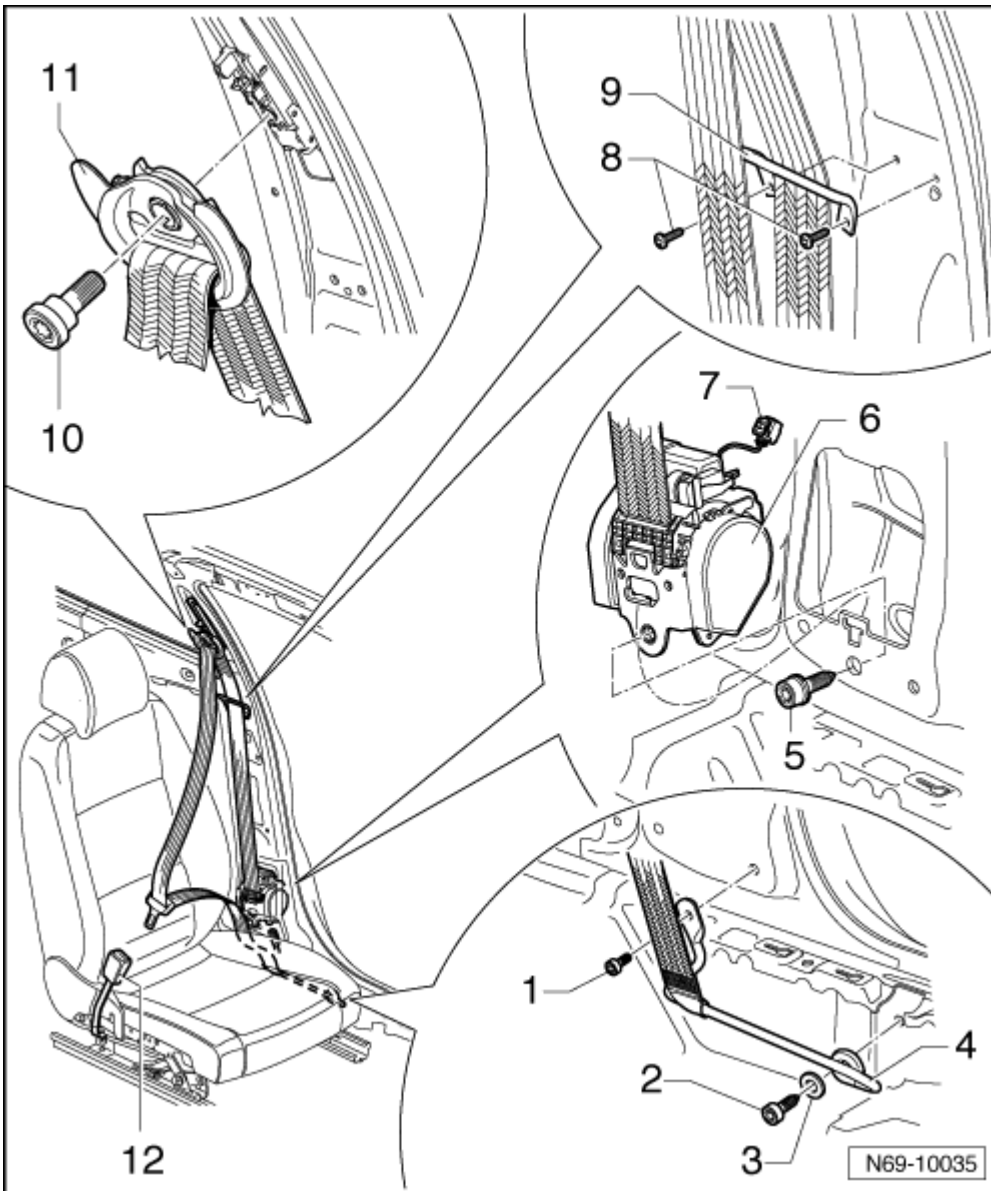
Identifying Front Seat Belts Removal/Installation Components (2-Door)
